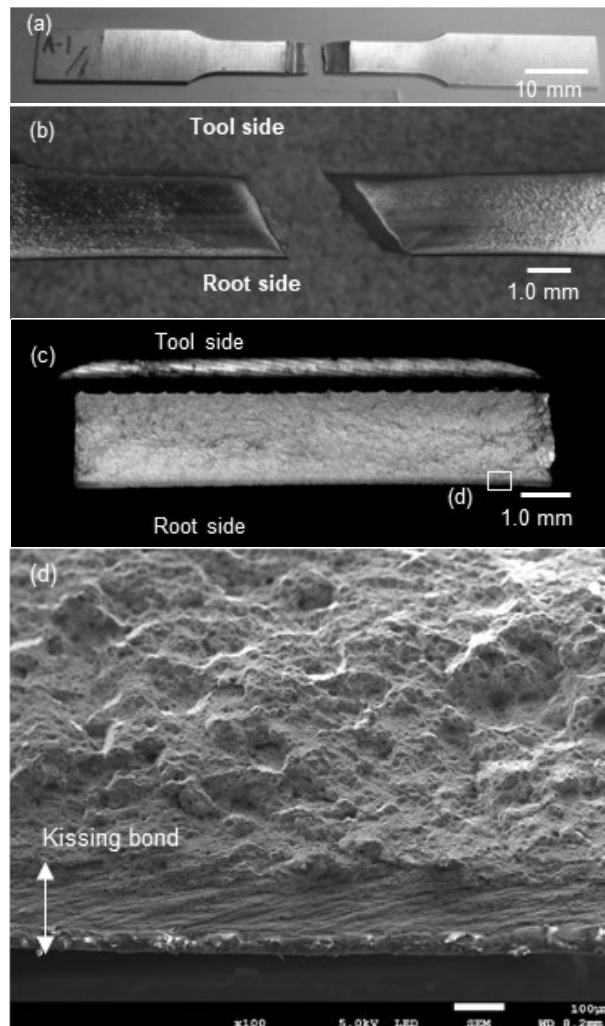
Fracture location and surface for weld A (a) top view, (b) side view, (c) fracture surface, and (d) fracture surface at a higher magnification
